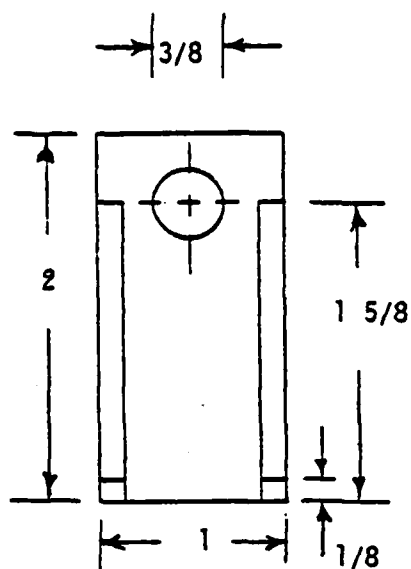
Hinge component parts used in the lower shaft assembly. Drawings are full scale, and dimensions are in inches.
